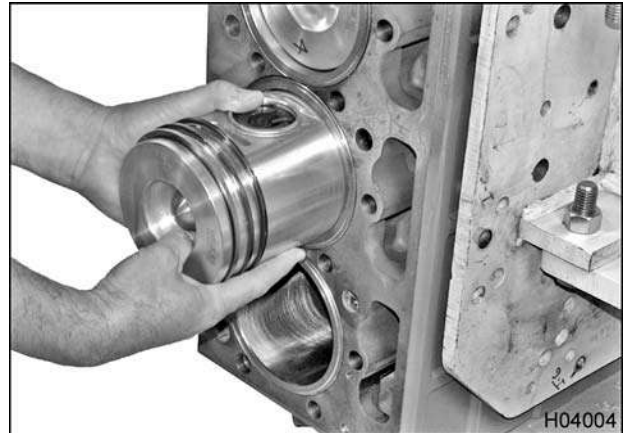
Removing piston and connecting rod assembly from cylinder sleeve
